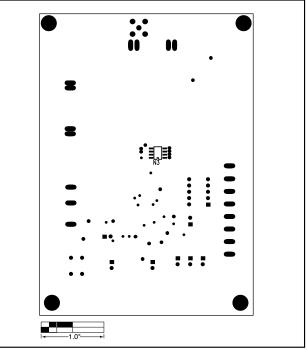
MAX1711 Voltage Positioning EV Kit Component Placement Guide—Solder Side
